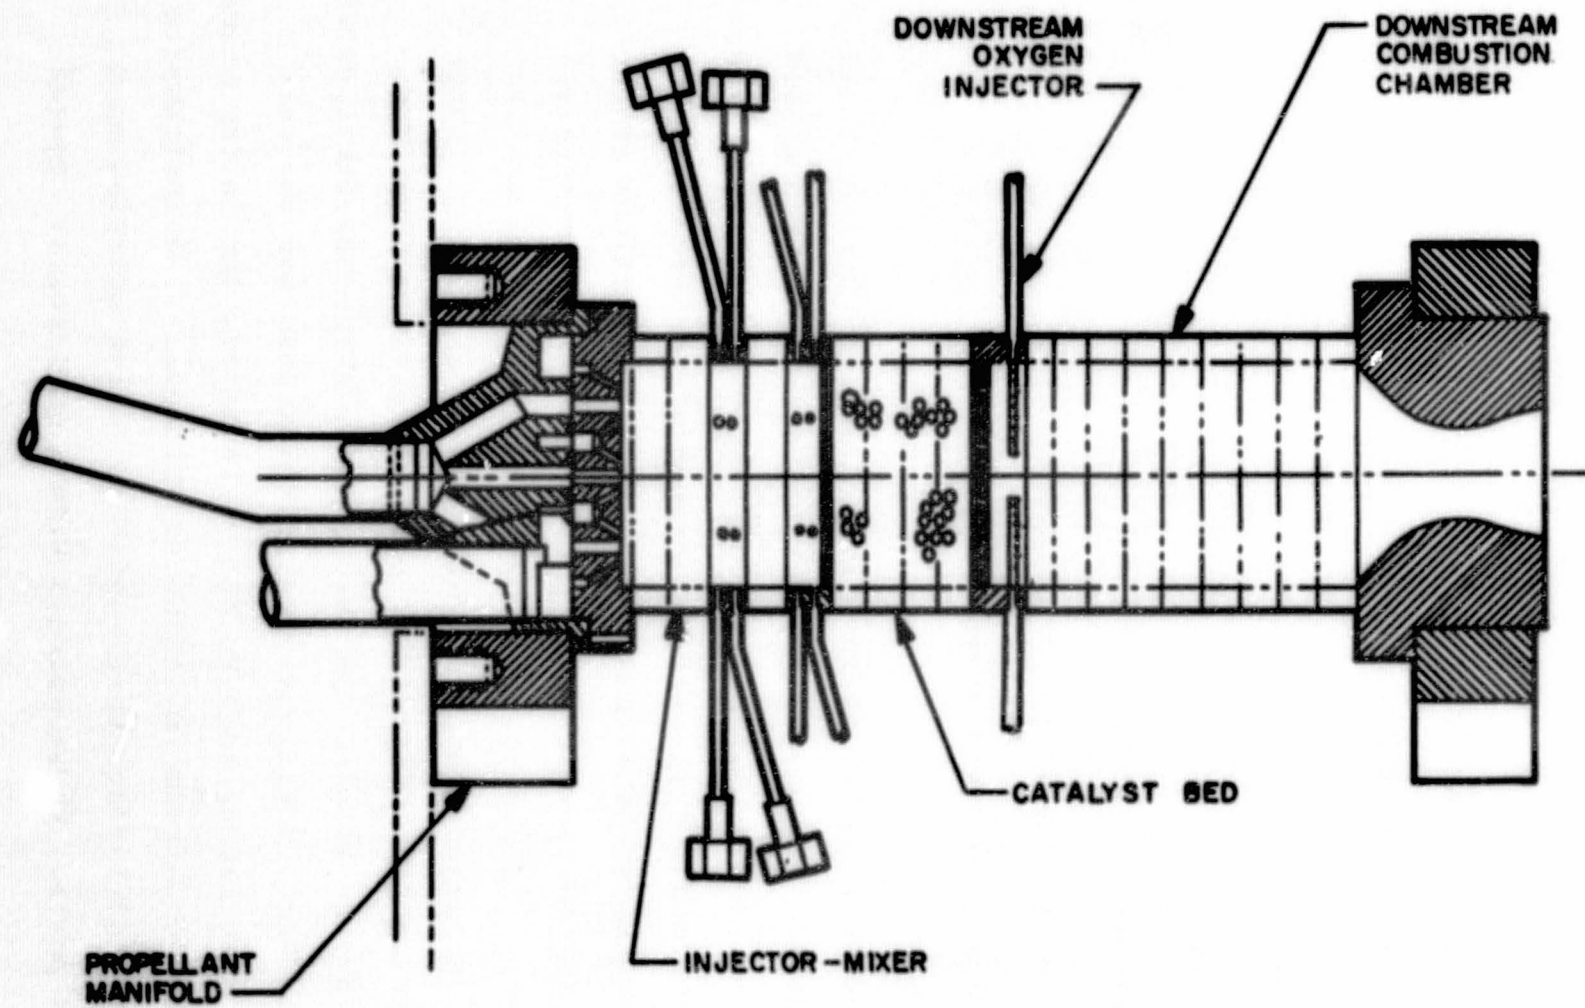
Experimental Thruster Design. The Spacer Rings Showing the Instrumentation Ports are Typical. The Engine Support Assembly is not Shown for Purpose of Clarity.
